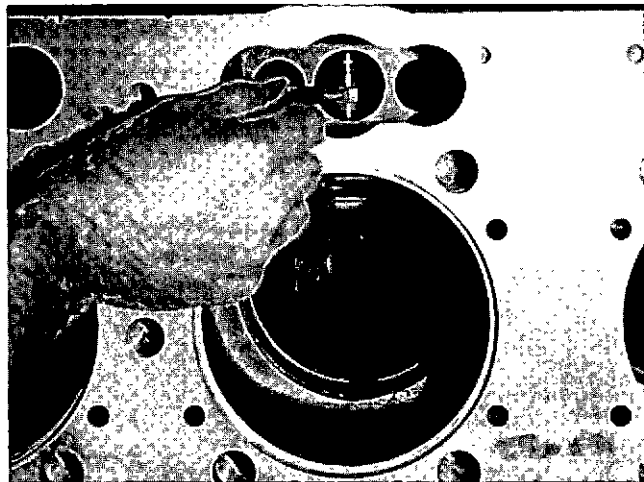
, V40127. Checking tappet bore inside diameter
